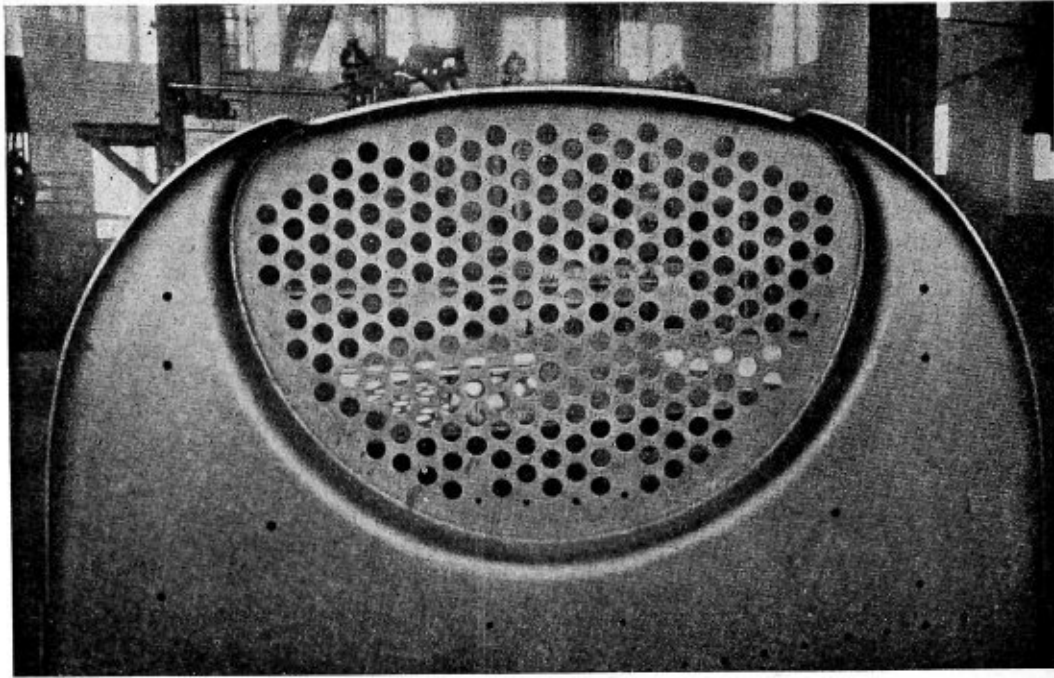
Back Tube Sheet Welded to Head
